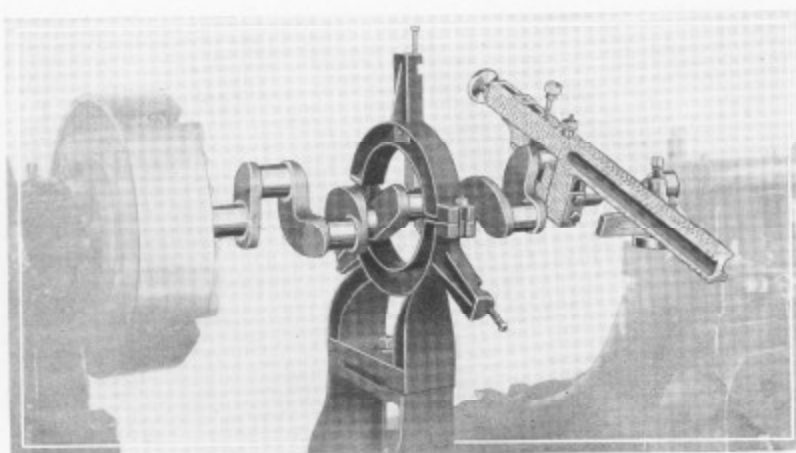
Truing Throw Bearings on a South Bend Lathe with a Special Tool
